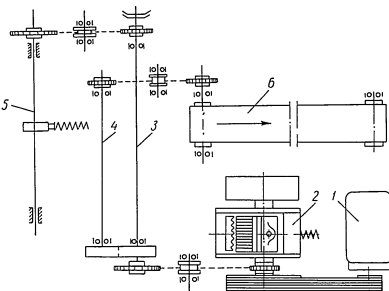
Kinematic scheme of the primary crushing unit CM-8:
